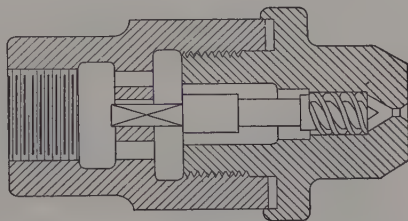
Centrifugal atomizer for producing cone-shaped spray.
